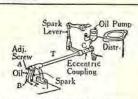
Control mechanism of oil supply. Note position of adjusting screw (A) at the left end of the cross-rod. The stroke of the oil pump is decreased by turning this screw (A) in a counter-clockwise direction. (B) is a crank connected with a shaft which passes through an outer tube (T), and the inner end of this shaft is connected with the adjusting cam (E, Fig. 14A) which governs the amount of stroke of plunger (P, Fig. 14A). The arm (B) connects with the foot accelerator and throttle control; thus as the throttle is opened for higher speeds the adjusting cam (E) is moved to a position which gives a greater stroke of plunger (P); consequently the quantity of oil pumped to the engine varies with the opening of the throttle.
